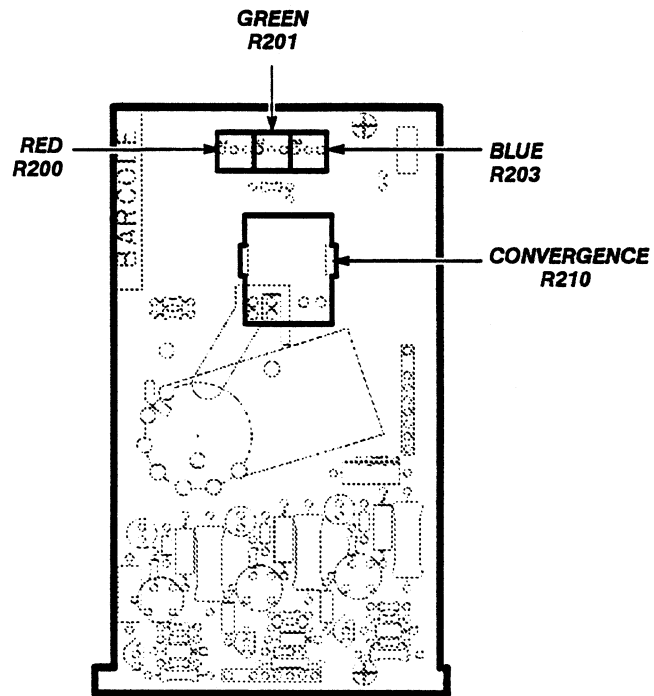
A7 CRT Socket Board Adjustment Locations
